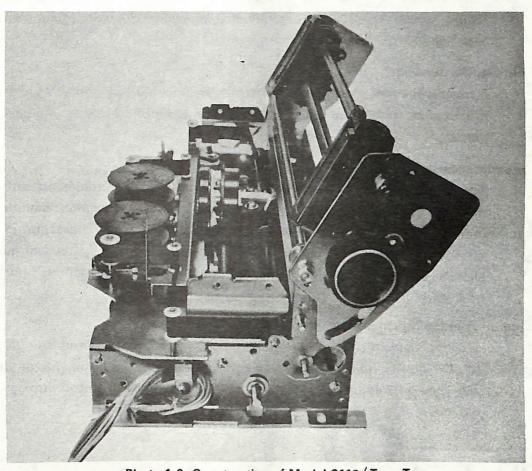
Construction of Model-3110 / Type T (as viewed from the frame B side)
